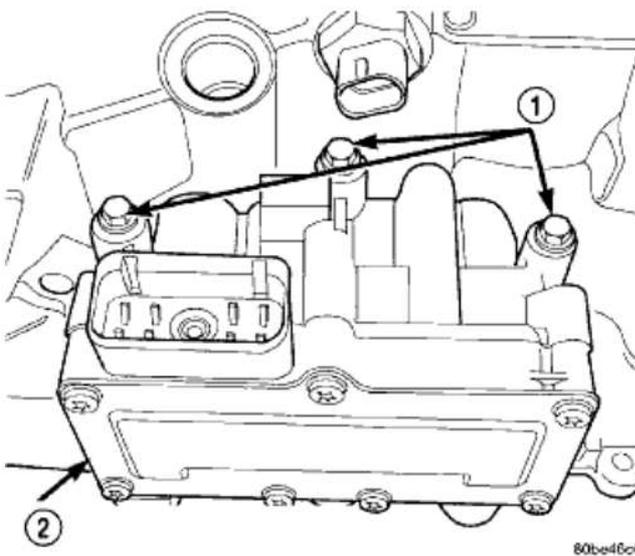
Removing/Installing Solenoid/Pressure Switch Assembly-To-Transaxle Case Bolts
